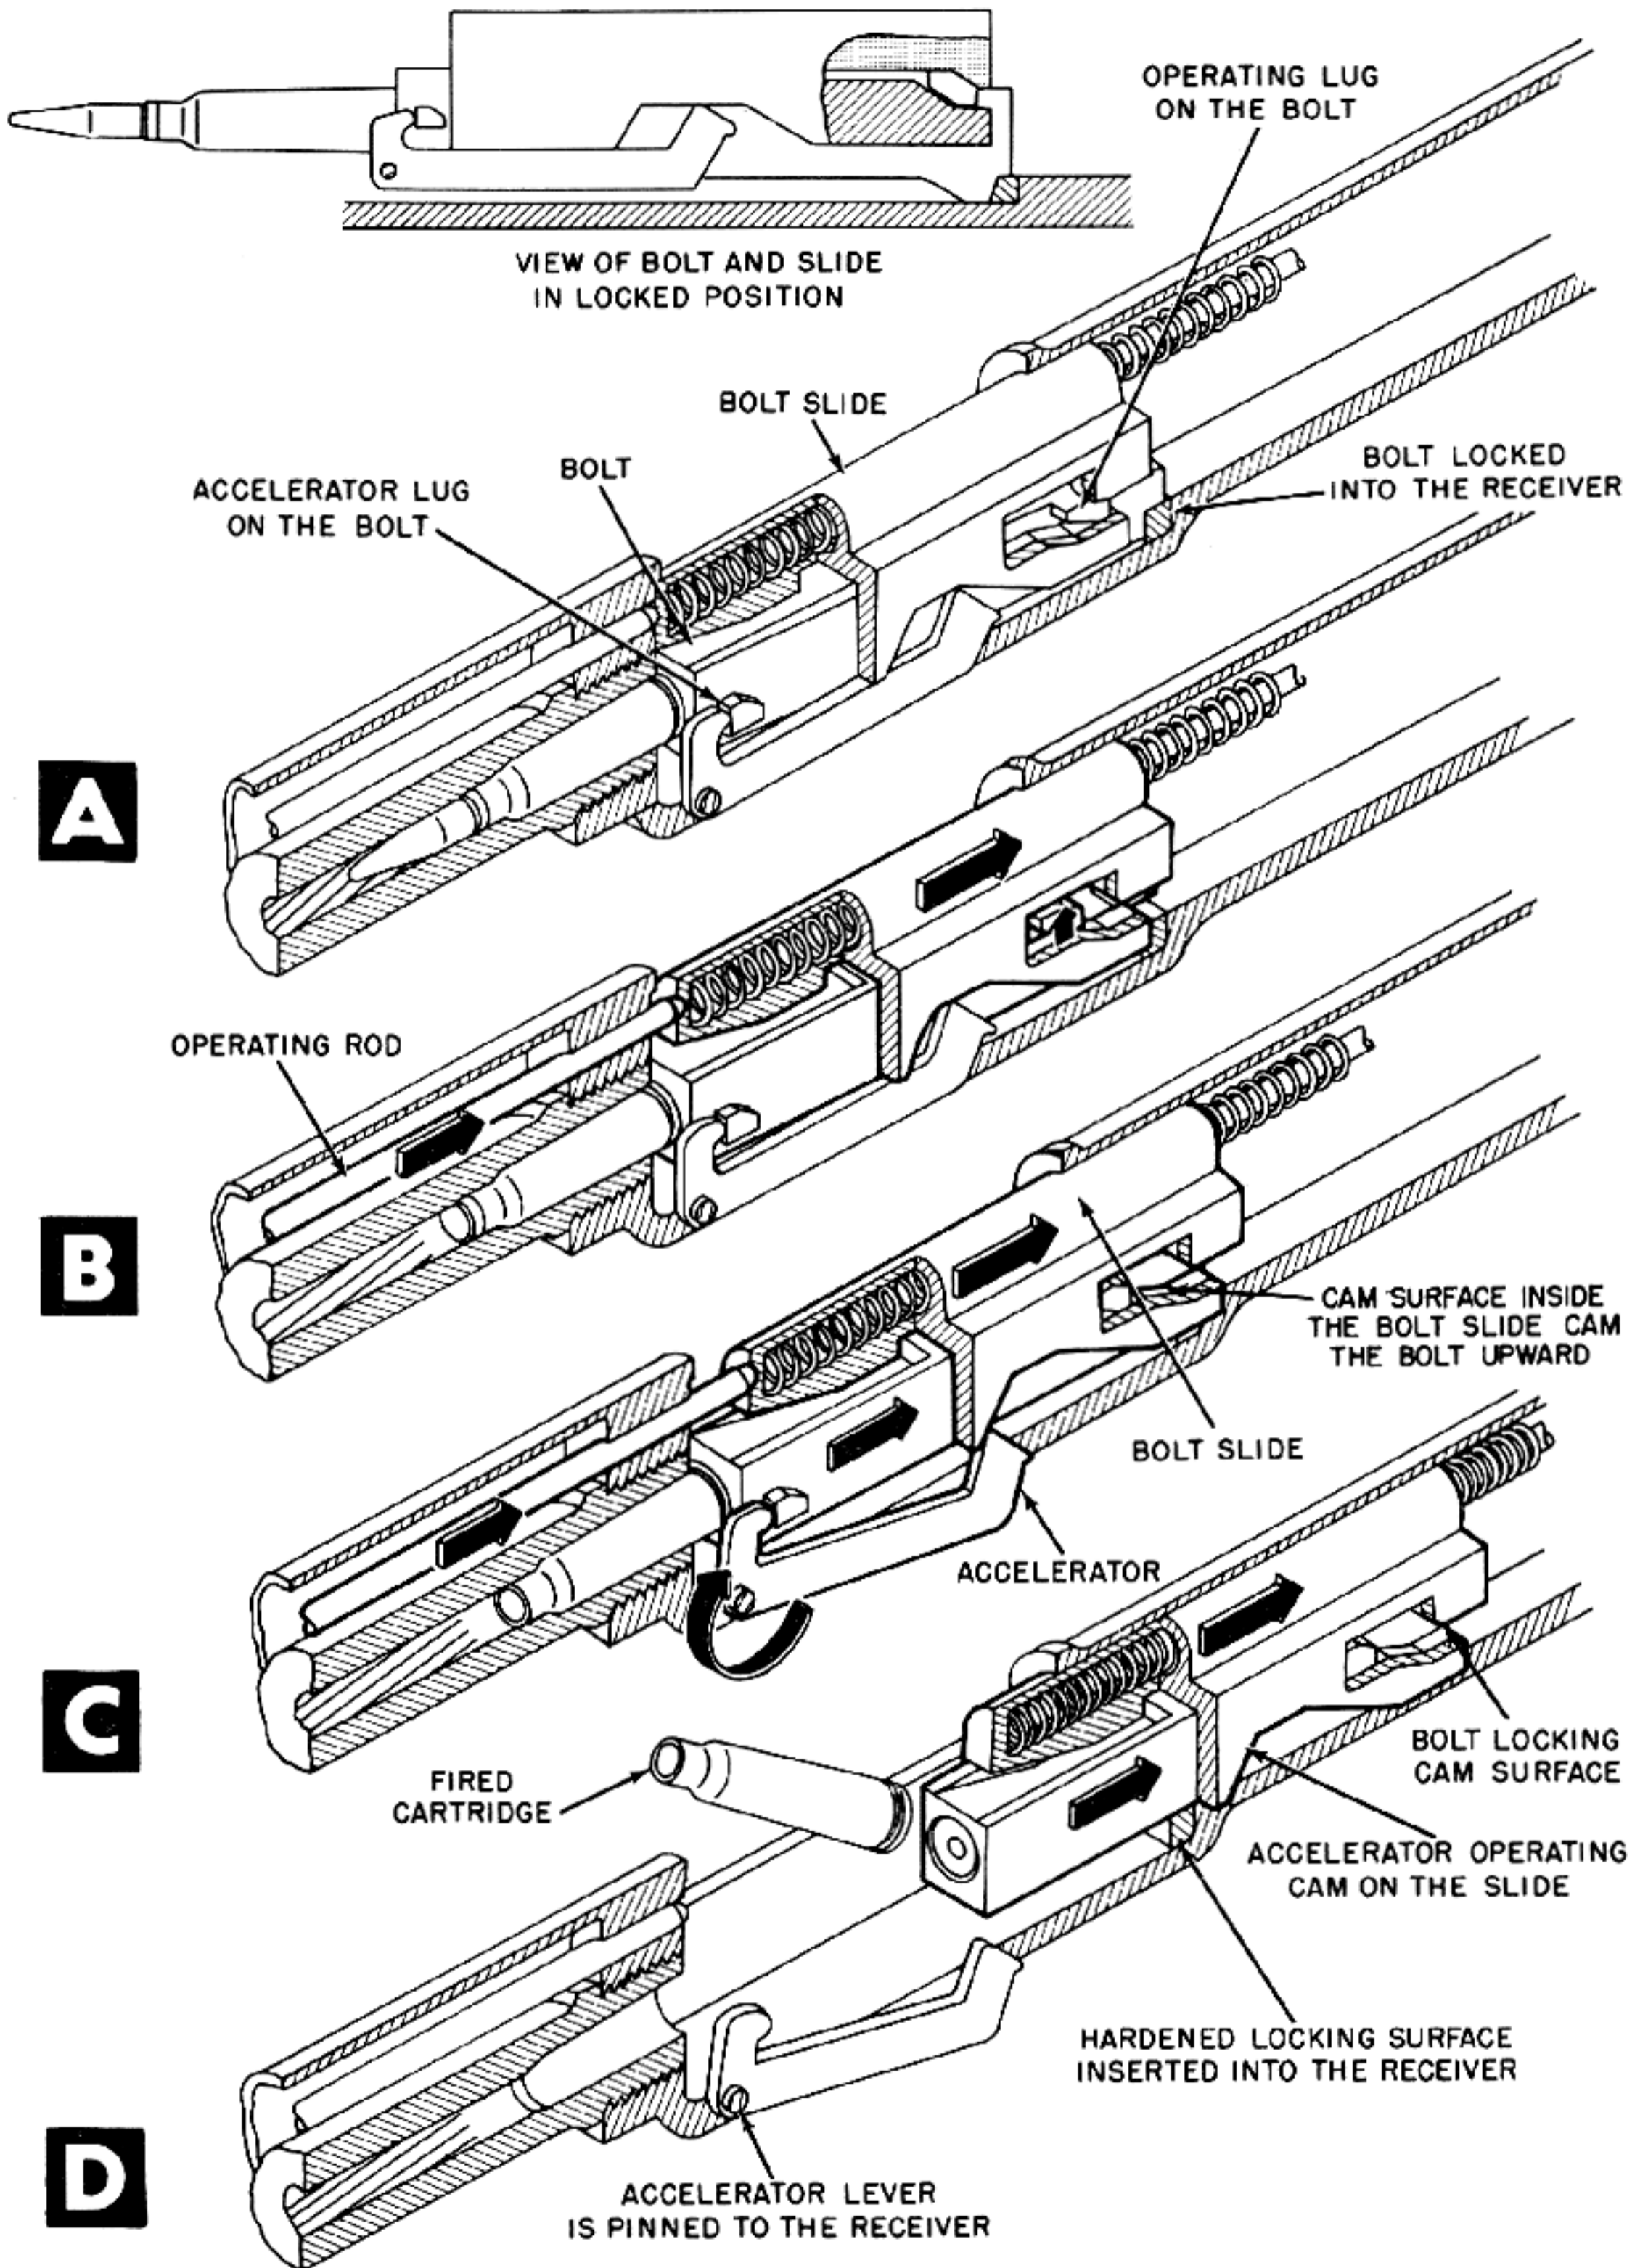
Bolt Slide Lifts Bolt Free of Locking Surfaces as It Recoils to Rear.
